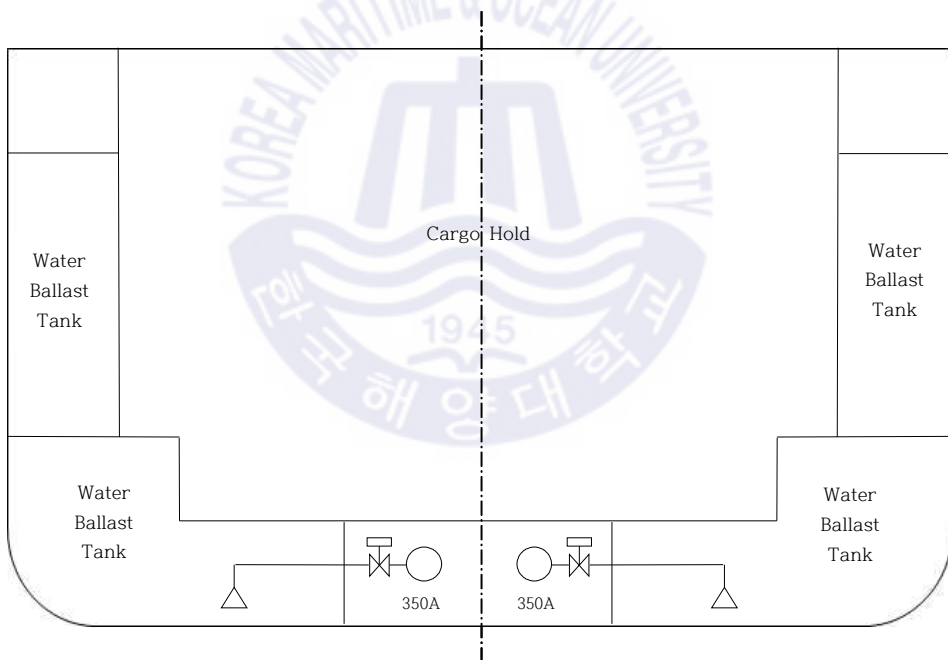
Sectional drawing of 23,000 TEU container vessel
